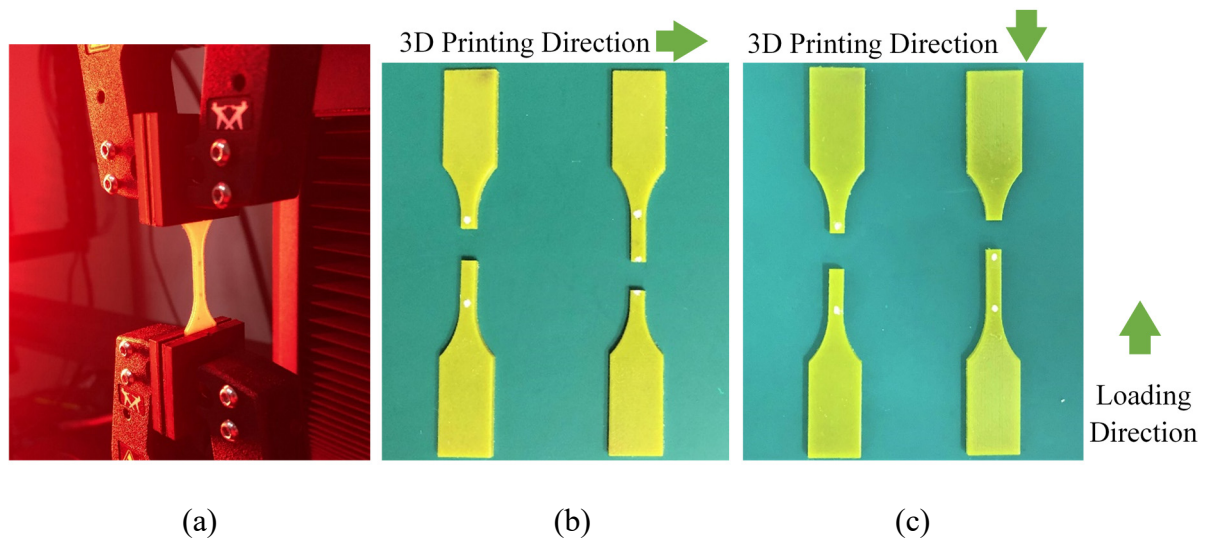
Tensile test: (a) Test set up. (b) specimens printed in transverse direction after the test; (c) specimens printed in perpendicular direction after the test.
